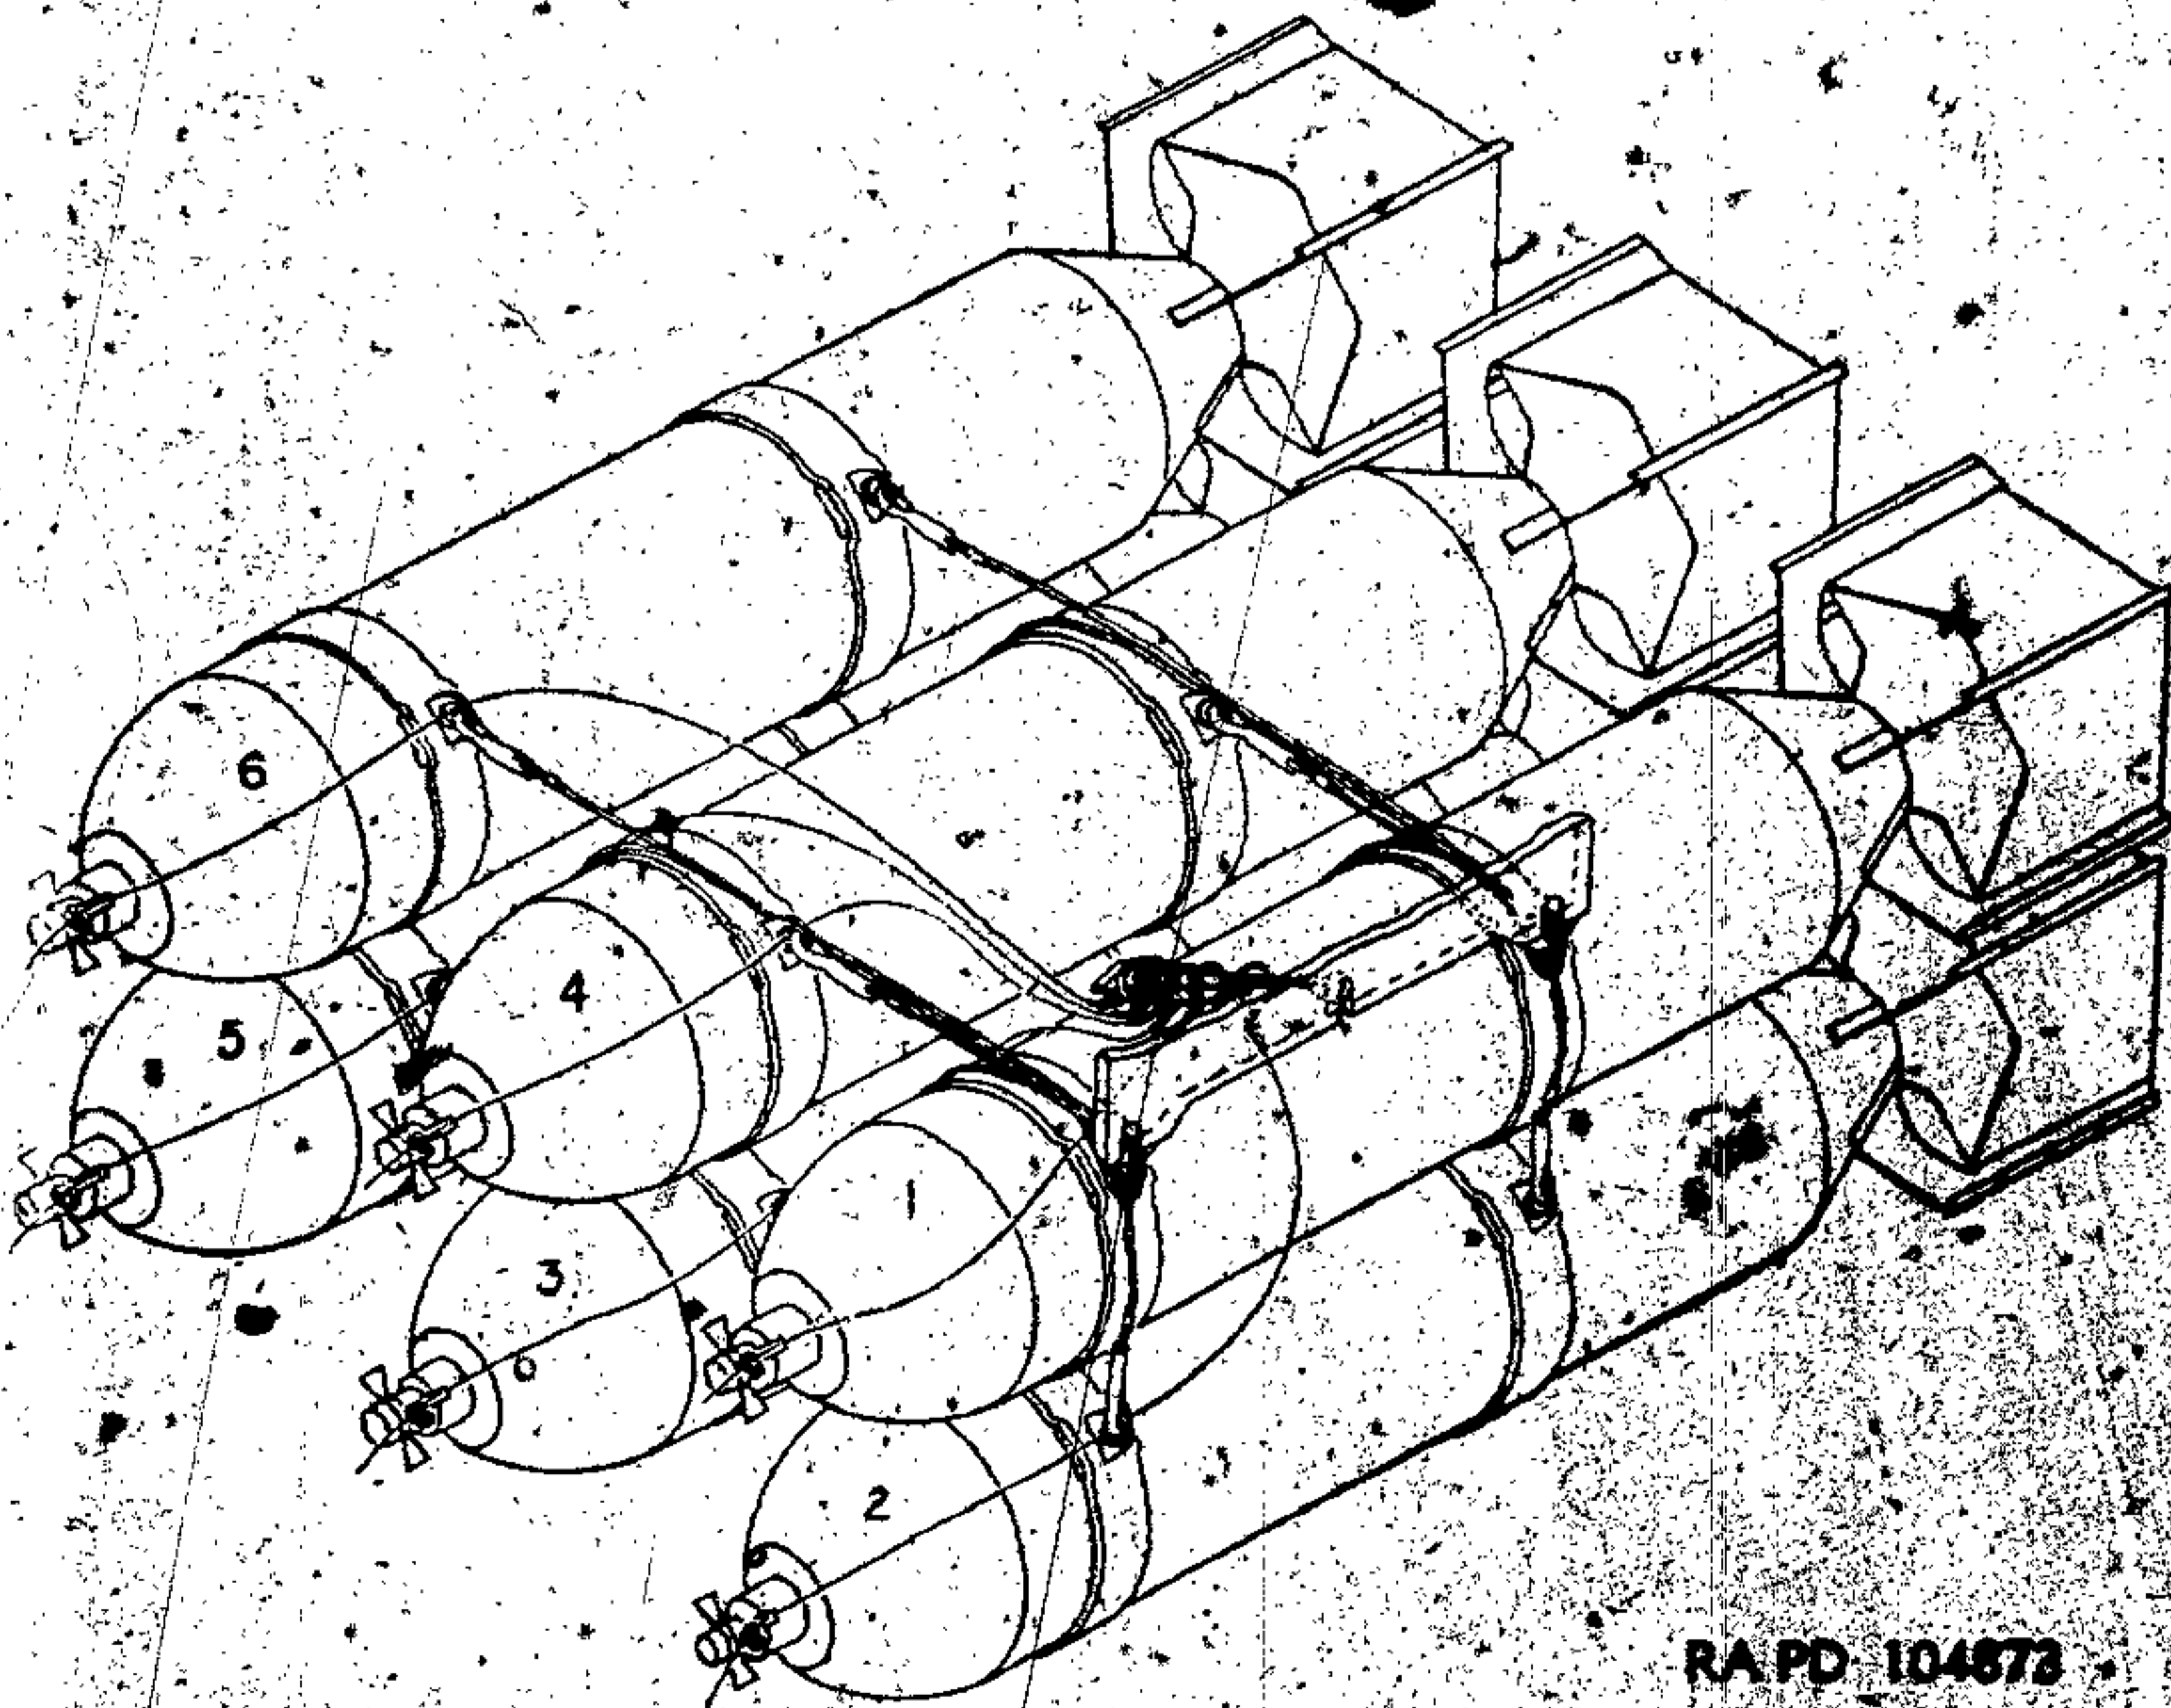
Bombs assembled in adapter, cluster, M24A1.
